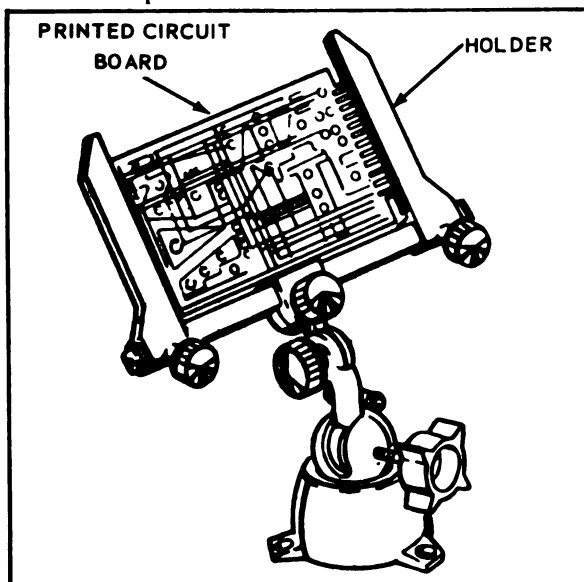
Holding Fixture for Printed Circuit Assembly
